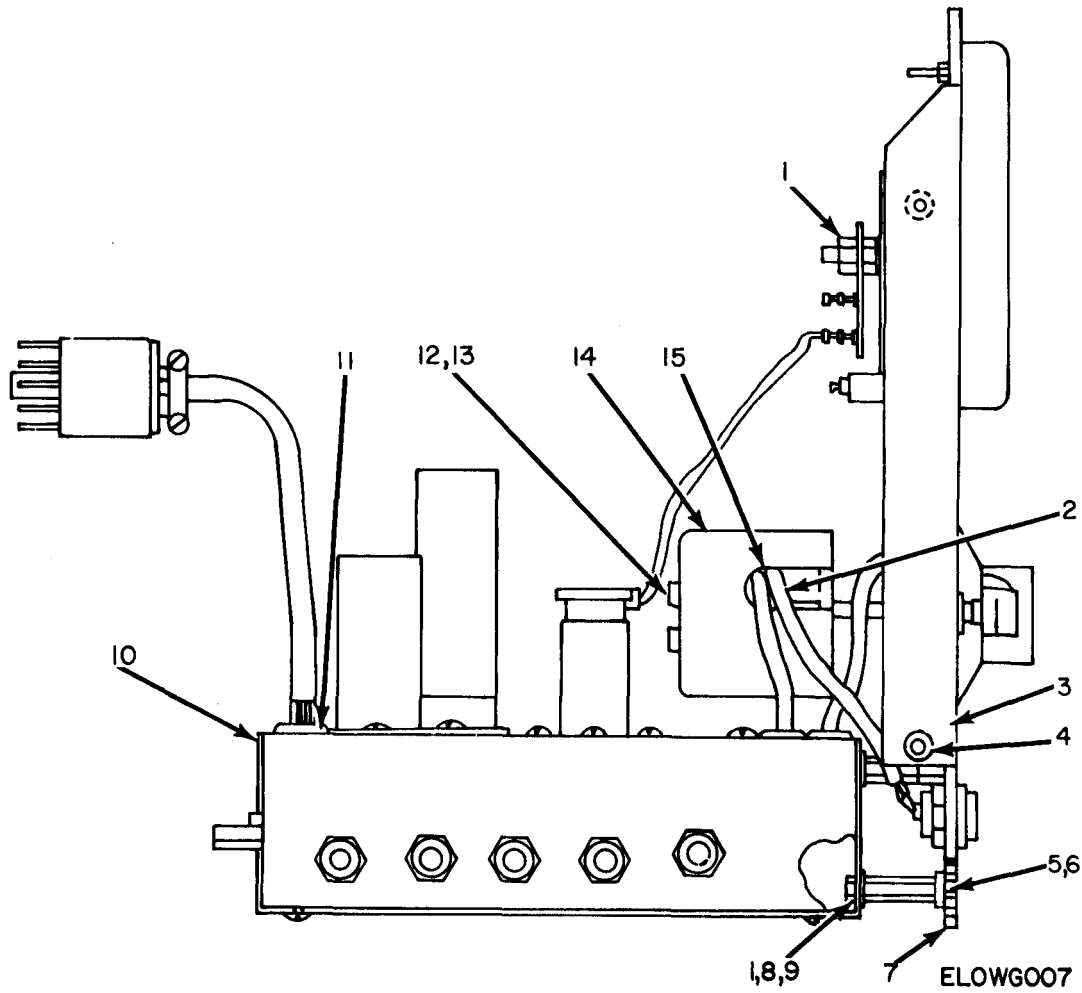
Voltmeter, Electronic ME-247/U or ME-247A/U, Panel Assembly, Right Side View.
